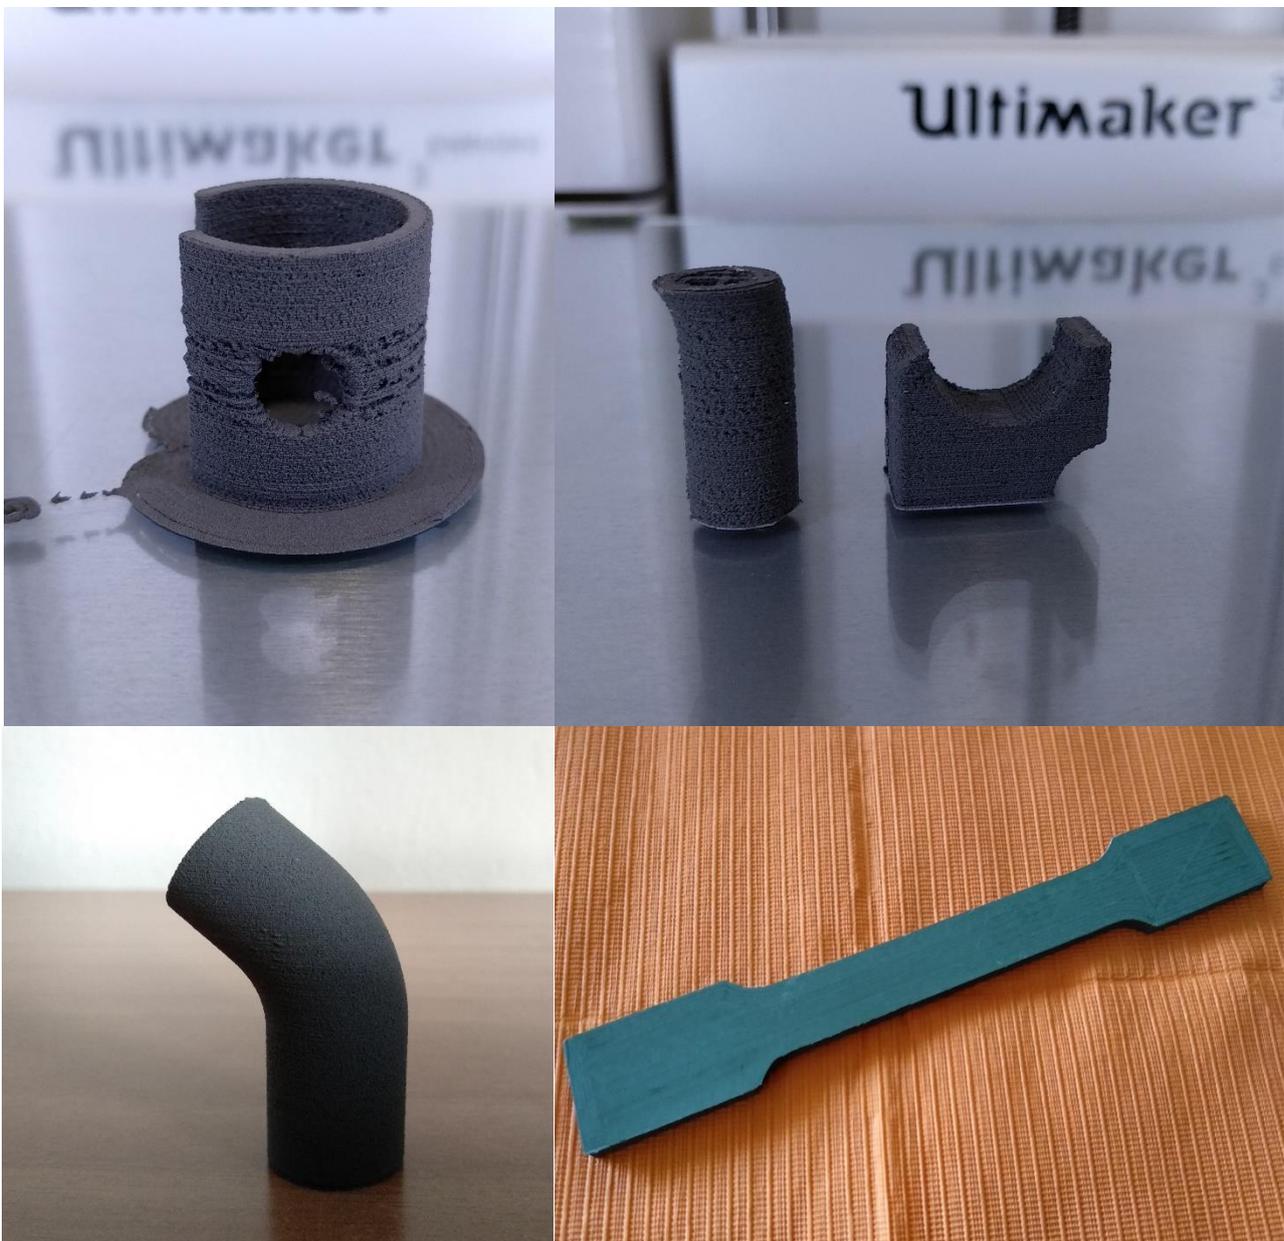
Upper section: Unsuccessful 3D printing parts, Lower section: Successfully 3D printed parts using optimized parameters.
